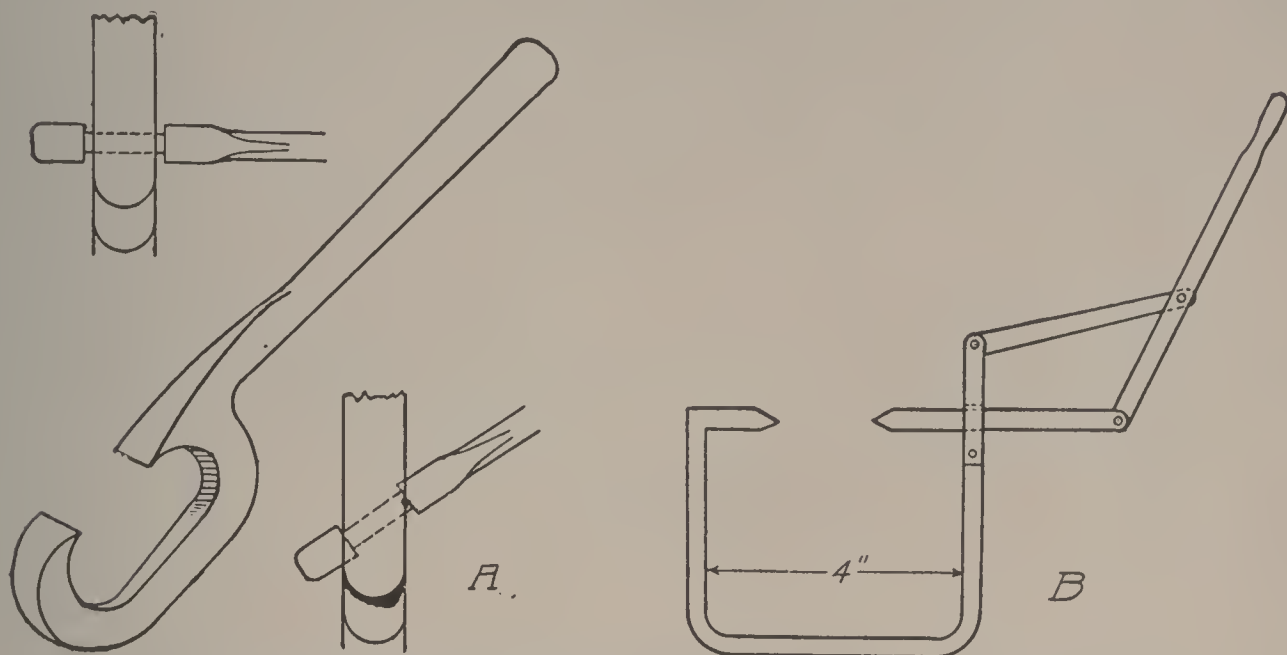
Handy Tools for Spreading Spring Leaves to Insert Lubricant
